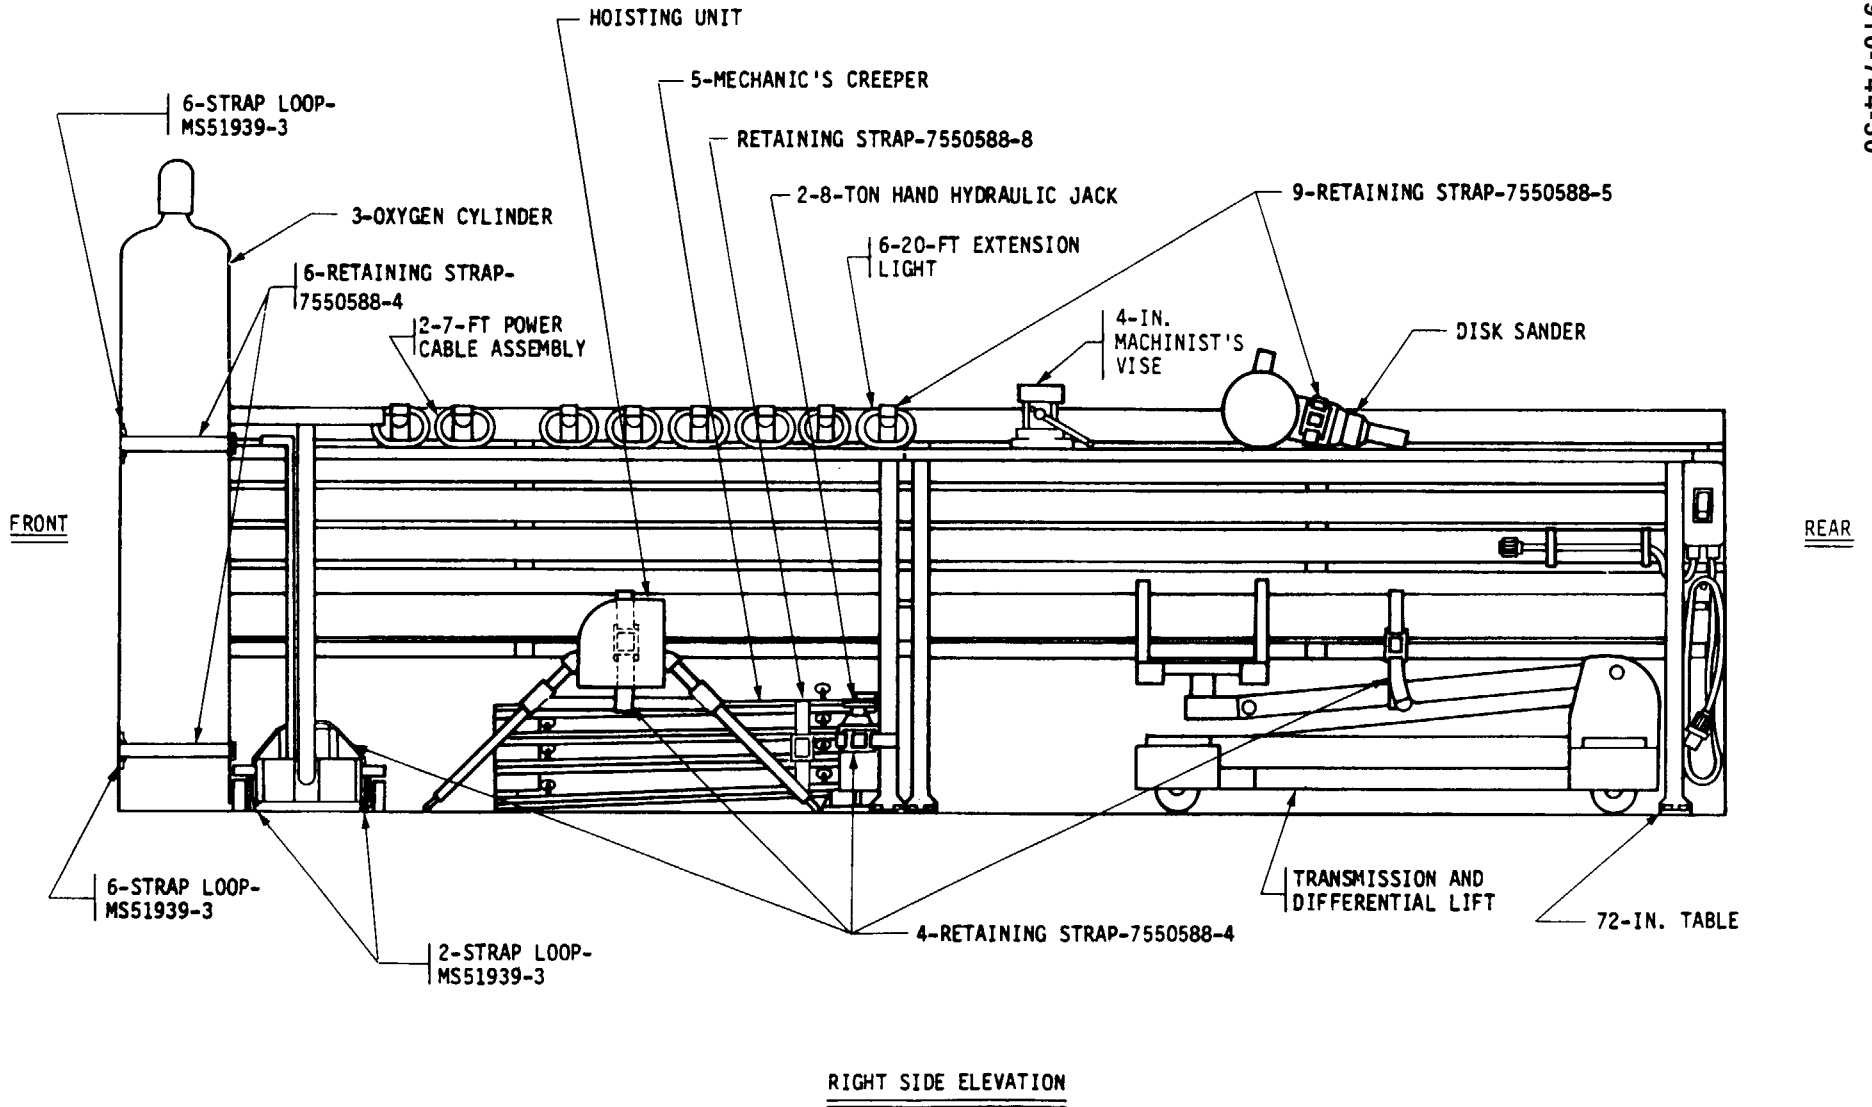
Components to be Mounted, Unit 3, M35A2, Right Side Elevation.
